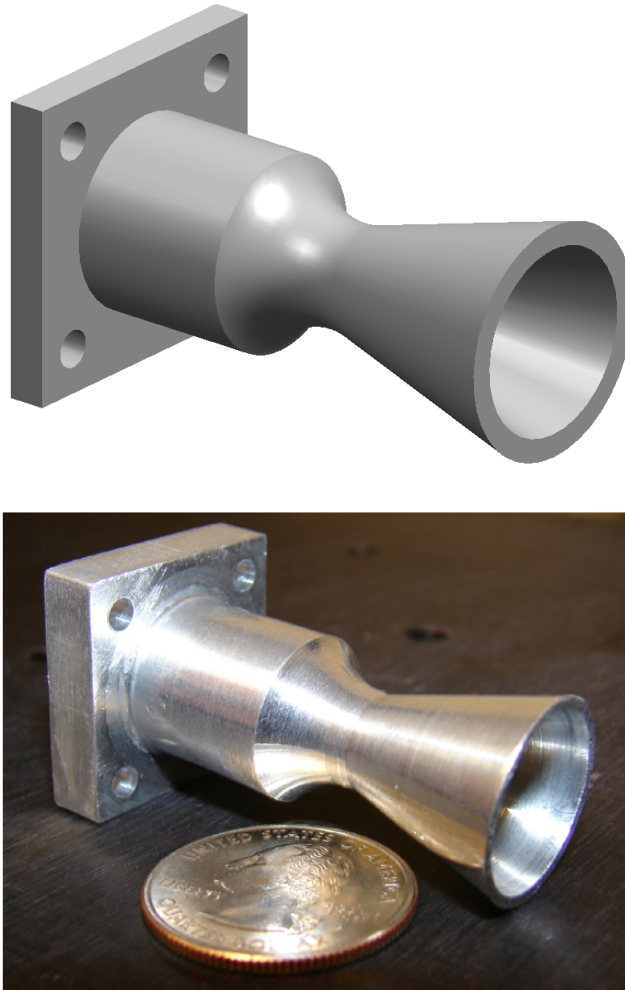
CAD model and machined aluminum converging-diverging nozzle.
